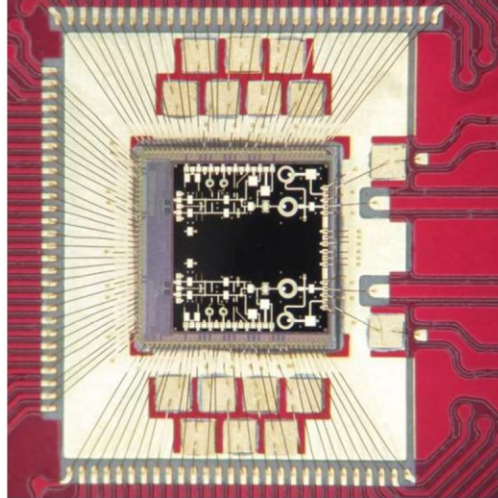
DAHI-Integrated Chiplet Die-Attached to PCB with External Wirebonds [48]
